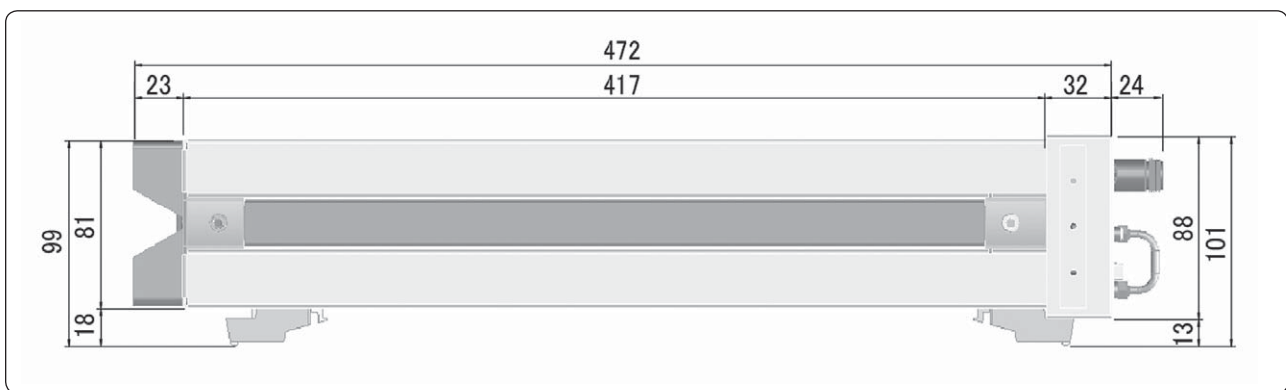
Dimensions (side view, with Option E5091A-016, in millimeters, nominal)
